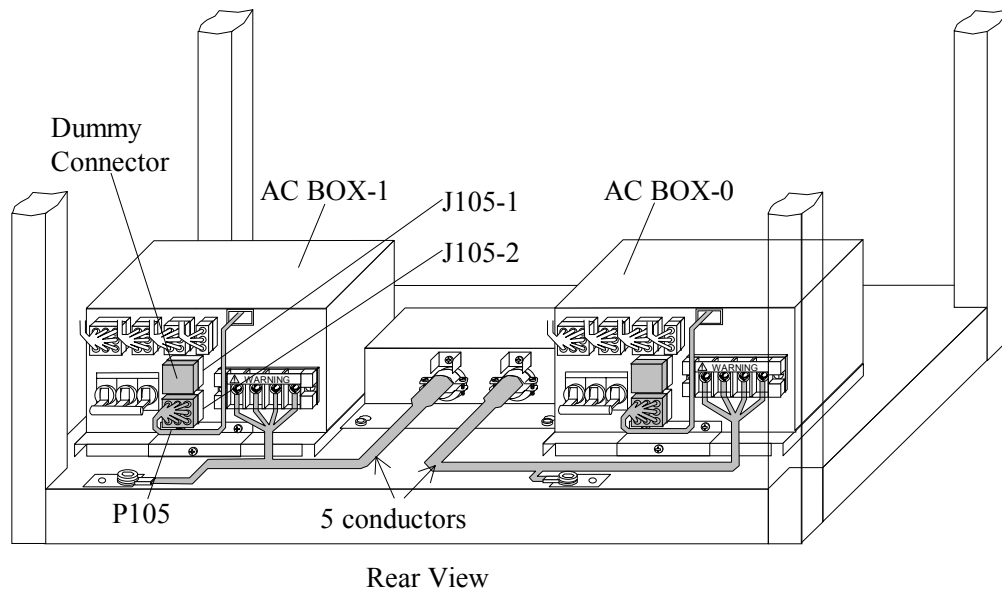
AC Input Cable Conductors and Jumper Cable (P105) Positions 380–415V
